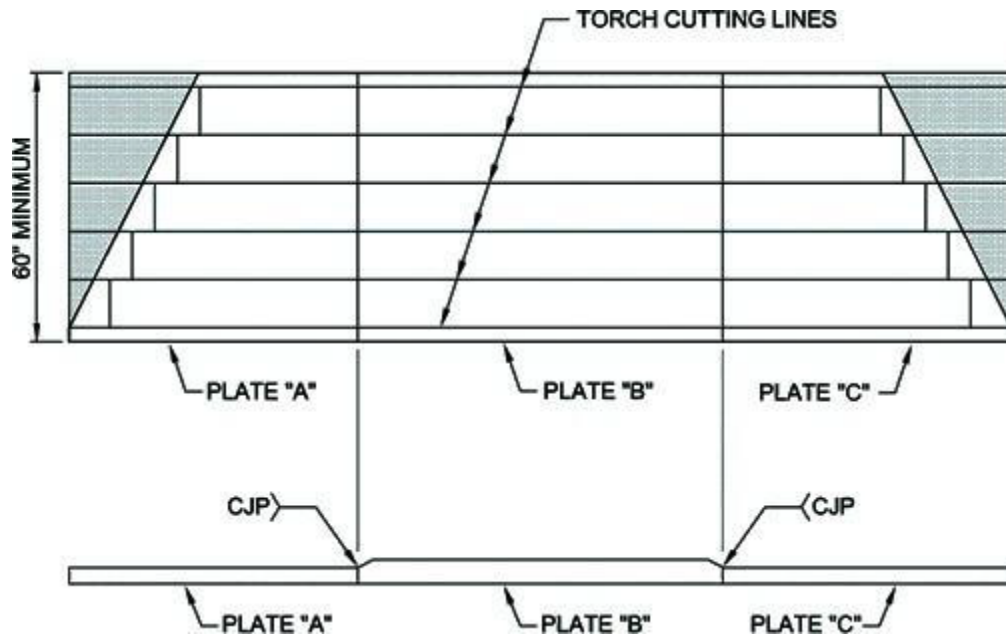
Straight Girder Example of Welding Wide Plates, then Stripping out the Flanges
